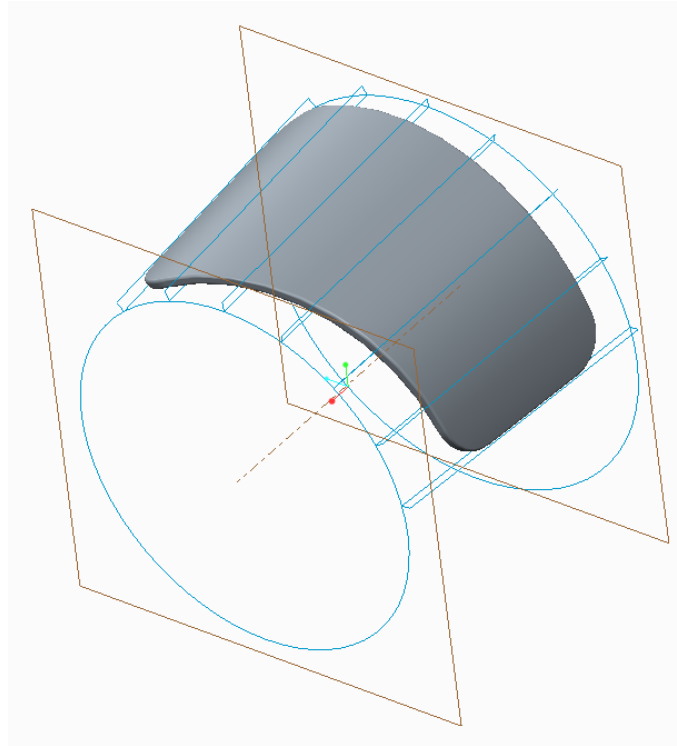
Inman talar implant surface design 1 after trimming and rounding.
